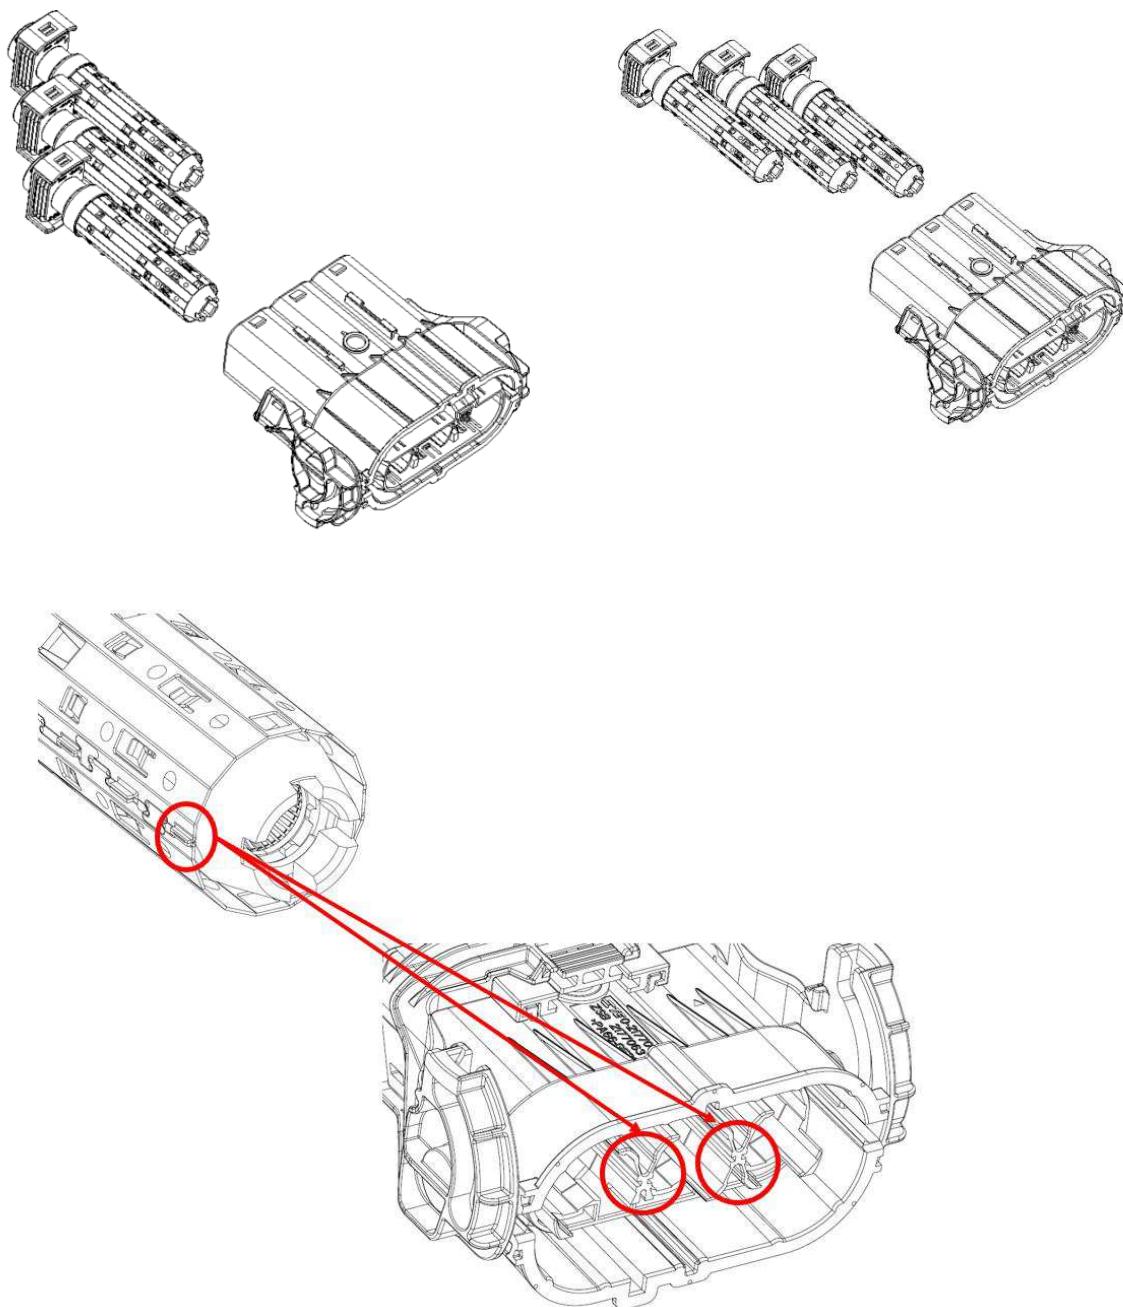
Assembly 3 pos. connector/Montage 3-pol. Stecker
